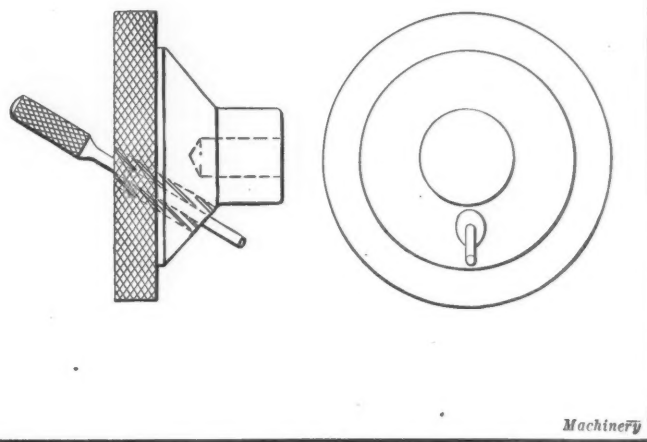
Gage for locating Angular Hole, Similar to that shown in Fig. 26
